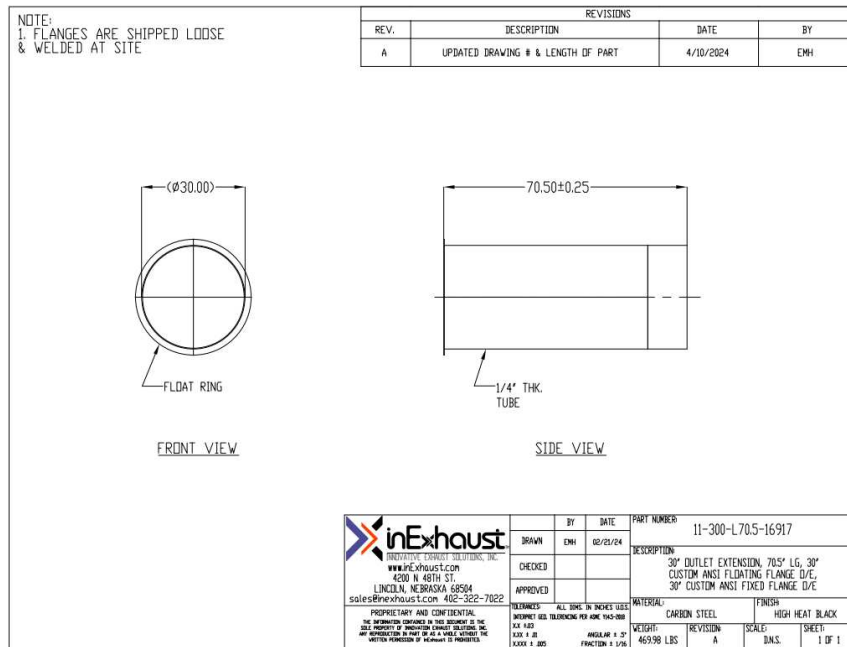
Horizontal exhaust pipe extension manufacturer drawing sheet.
